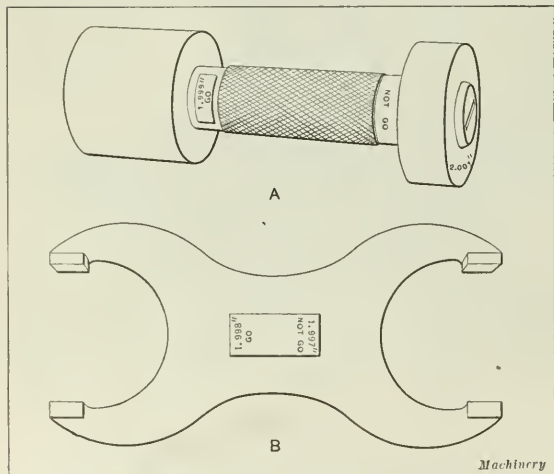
Limit Working and Inspection Plug and Snap Gages
